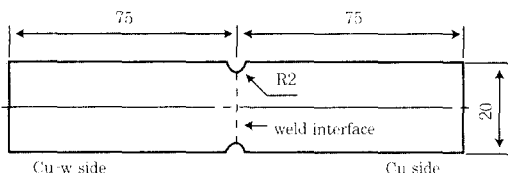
Shape and dimension of tensile test specimen(unit : mm)
